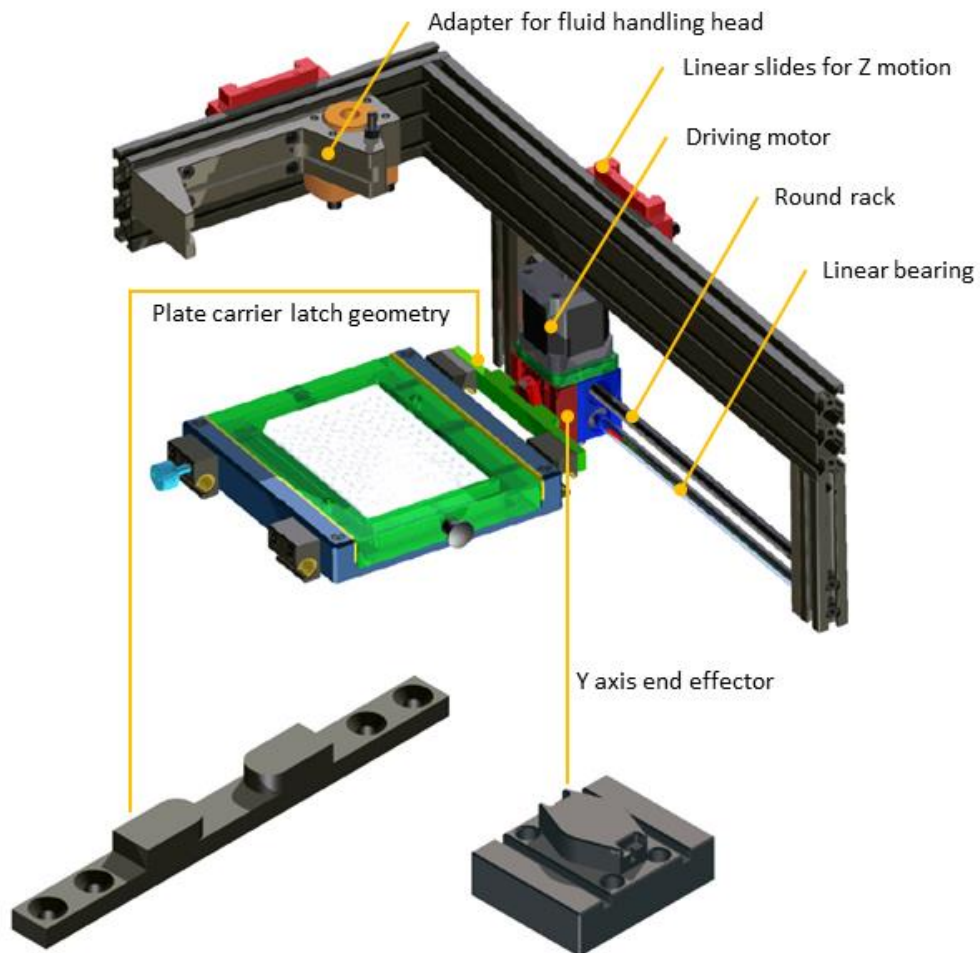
The Y axis motion system is used to bring the microtiter plates in and out of the working position of the fluid handling head
